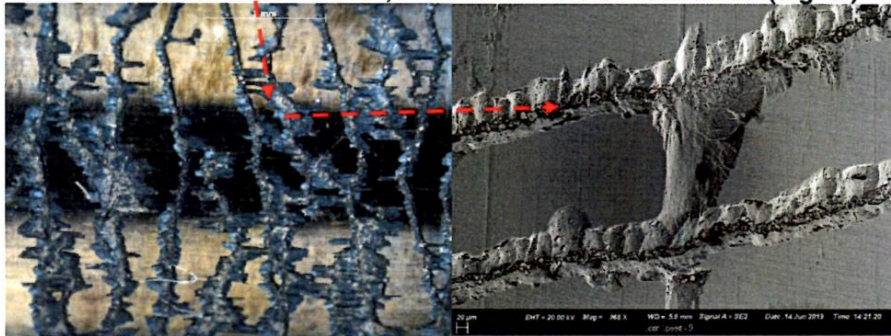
Exhaust valve stem, transverse stress cracking initiations, discoloring (Stereo/FEGSEM)
